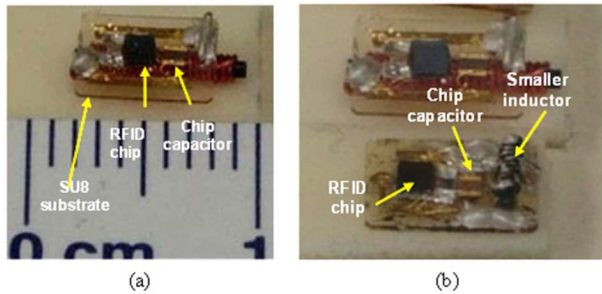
Completed millimeter scale transponders built on micromachined SU8 plastic package which is measured 8 mm \times 3 mm in dimension. (a) A transponder that deploys a 2.2- μ H solenoid inductor as its coupling element; the inductor has a core diameter of 750 μ m and a length of 8 mm; and (b) New transponder that has a 0.5- μ H inductor as its coupling element; the inductor has a core diameter of 750 μ m and a length of 3 mm.
